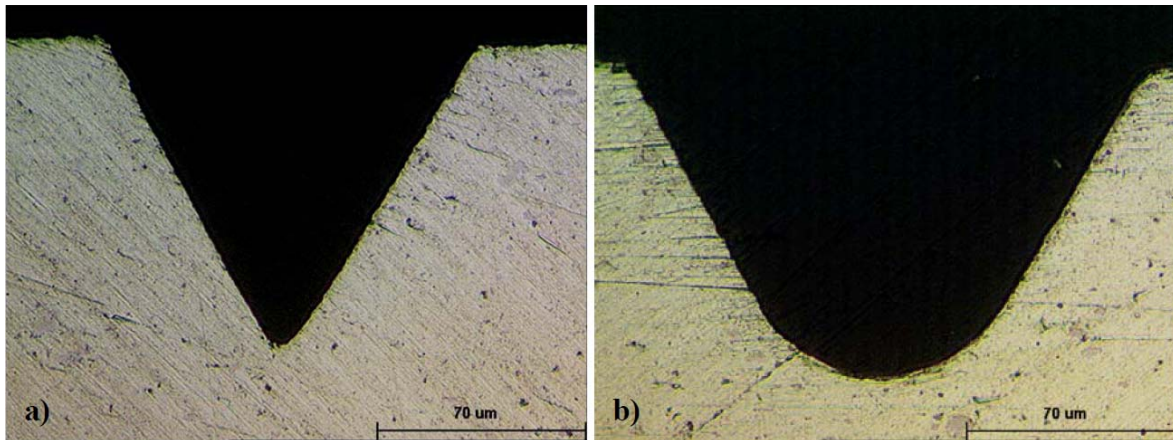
Cross section shape of diamond tool machined notches: (a) 100 μm deep 5 μm root radius notch; (b) 100 μm deep 50 μm root radius notch
